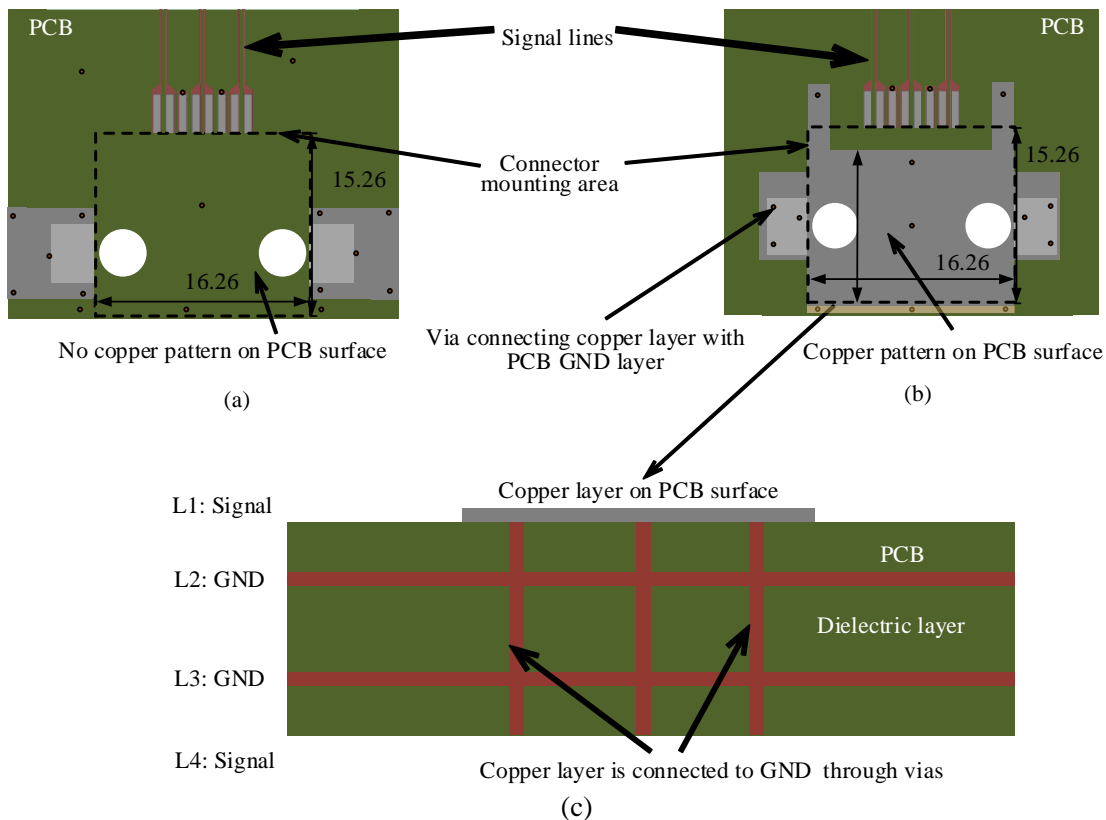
Footprint of female connector (a) original footprint of female connector on PCB surface (b) improved footprint of female connector on PCB surface (c) cross-sectional view of PCB layer.
